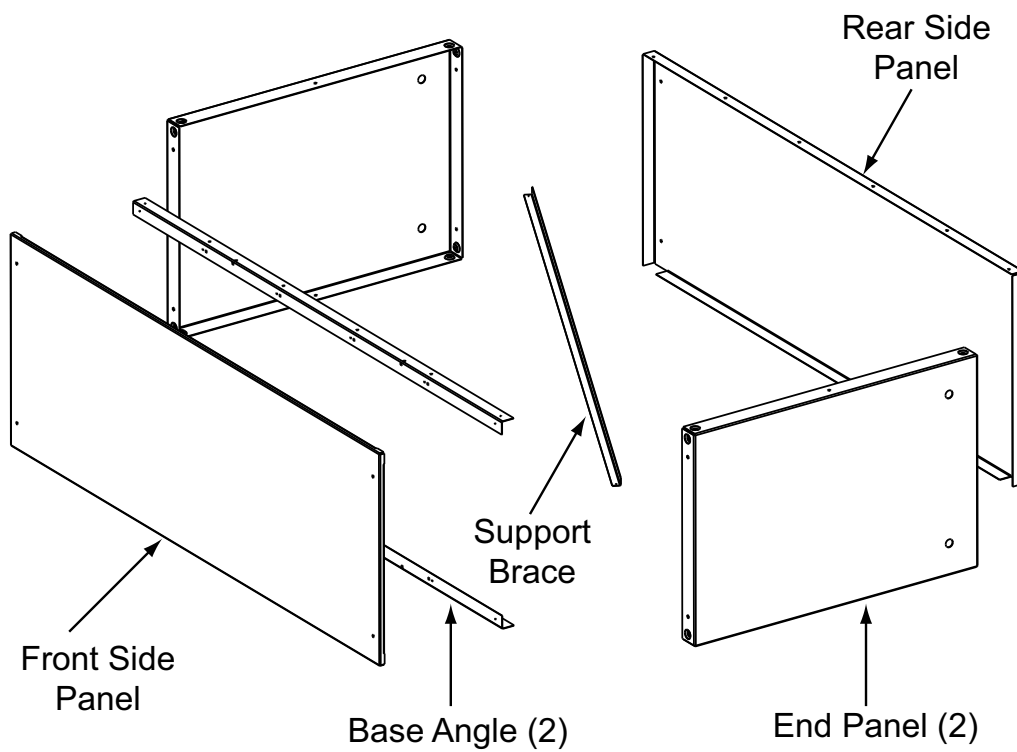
EXPLODED VIEW OF BASE MODEL 1BS0403
